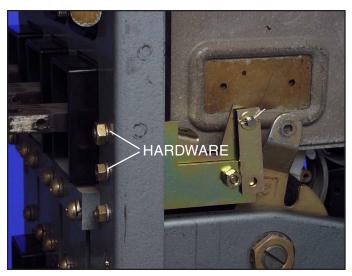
Reset Assembly Secured to the Breaker Back Plate
